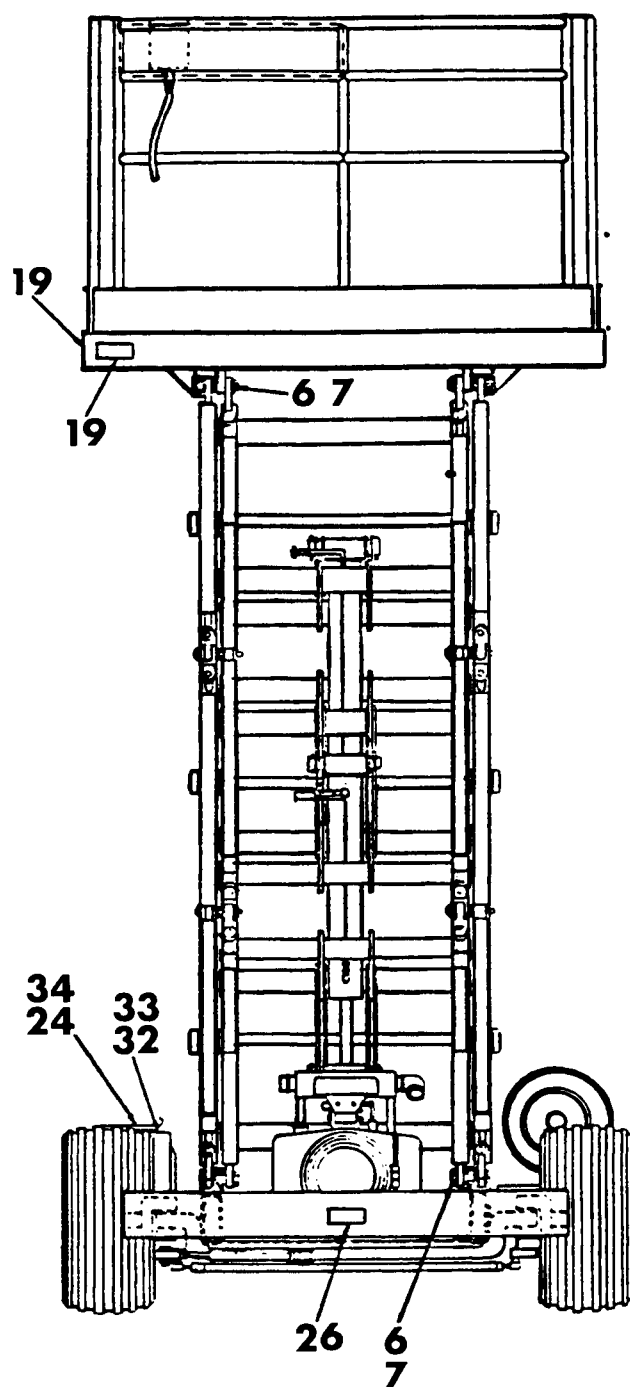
C - FINAL ASSEMBLY (RT25G)
